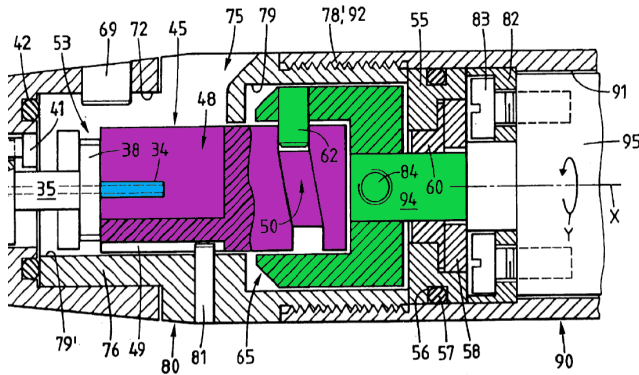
Schematic representation of the pin and cam groove mechanism. Relevant components: 34 = inner cutting tube, 48 = connection piece, 50 = groove formed in connection piece, 62 = pin, 65 = U-shaped bracket, 94 = driveshaft, 95 = electric motor. Adapted from: [81]
